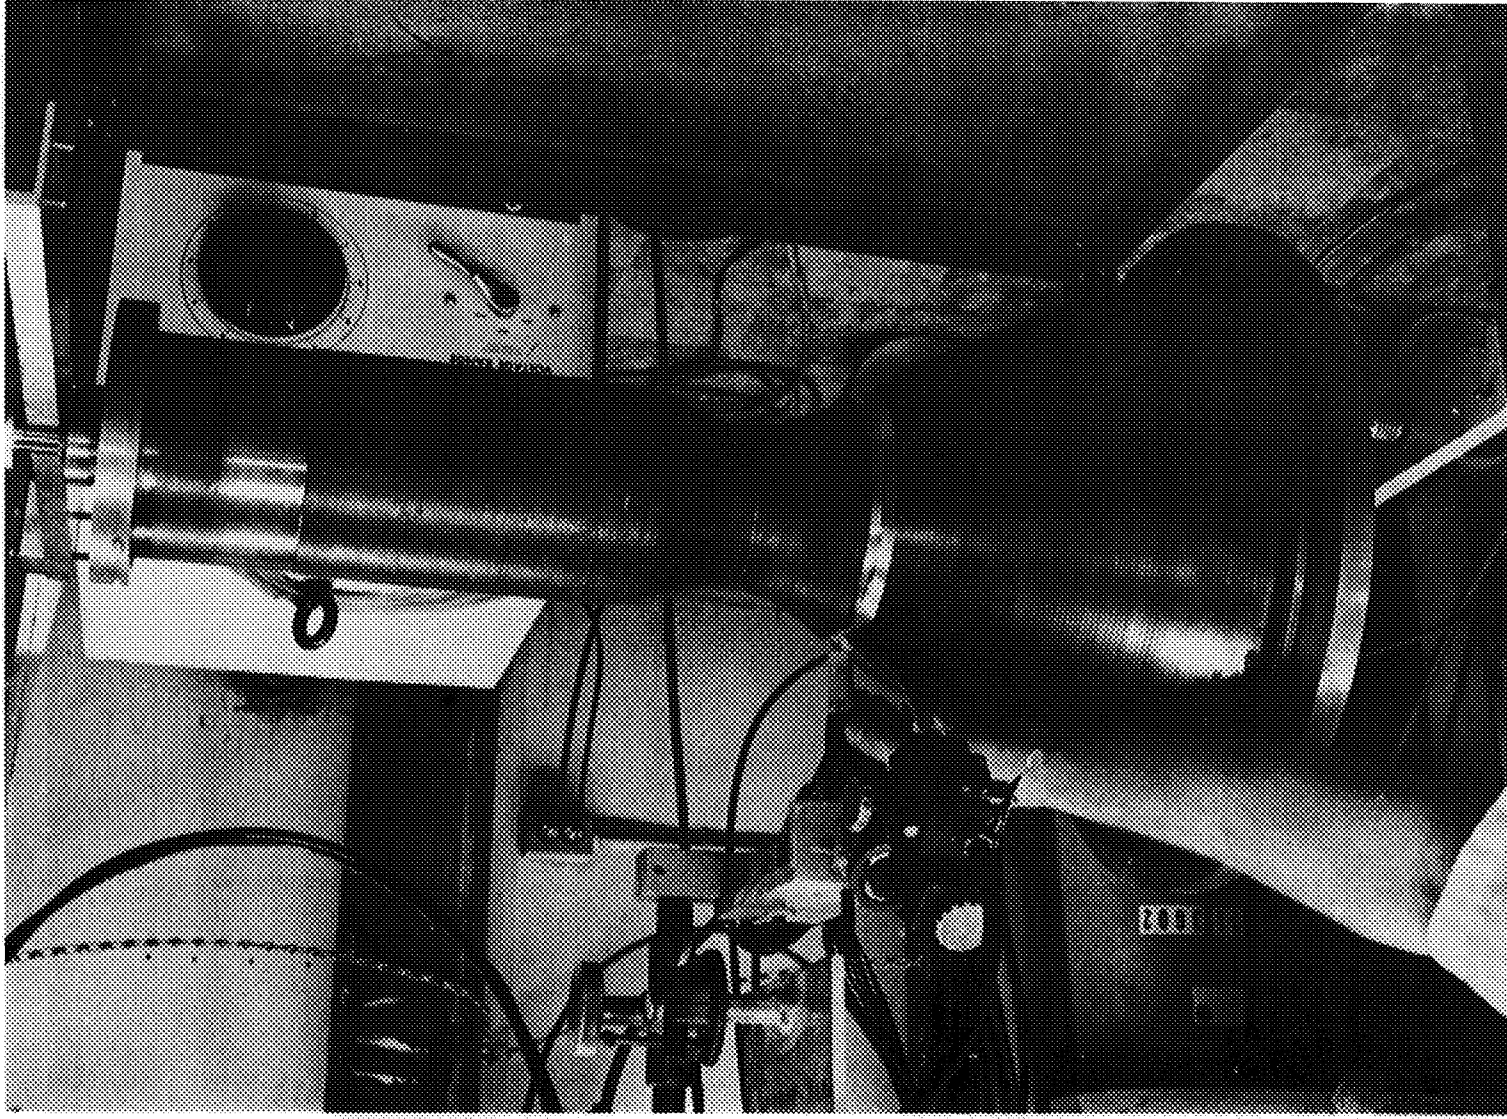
Automatic TIG Welding of the Chamber Inner Liner
